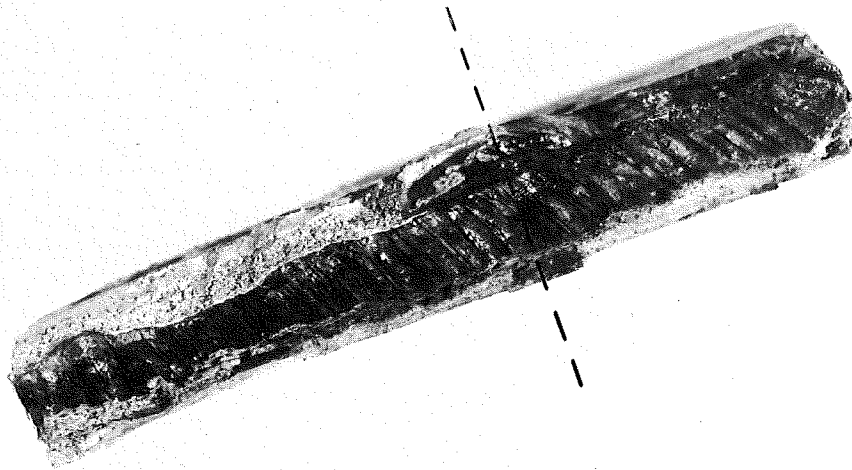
View of Crack Surface of TIA-NB Bottom Showing
